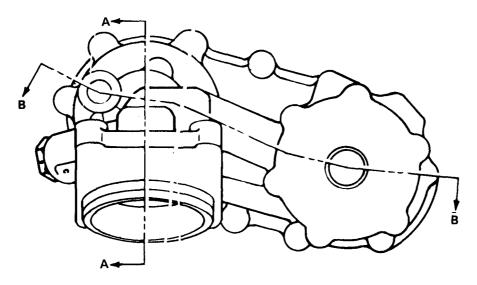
Fits, Clearance and Backlashes (T53-L-13B/703 Engines) (Sheet 3 of 4)
